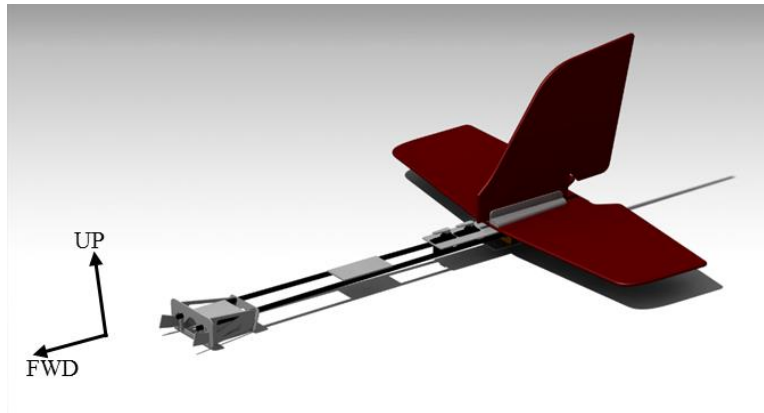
CAD model of the fixed-wing UAS tail subassembly
